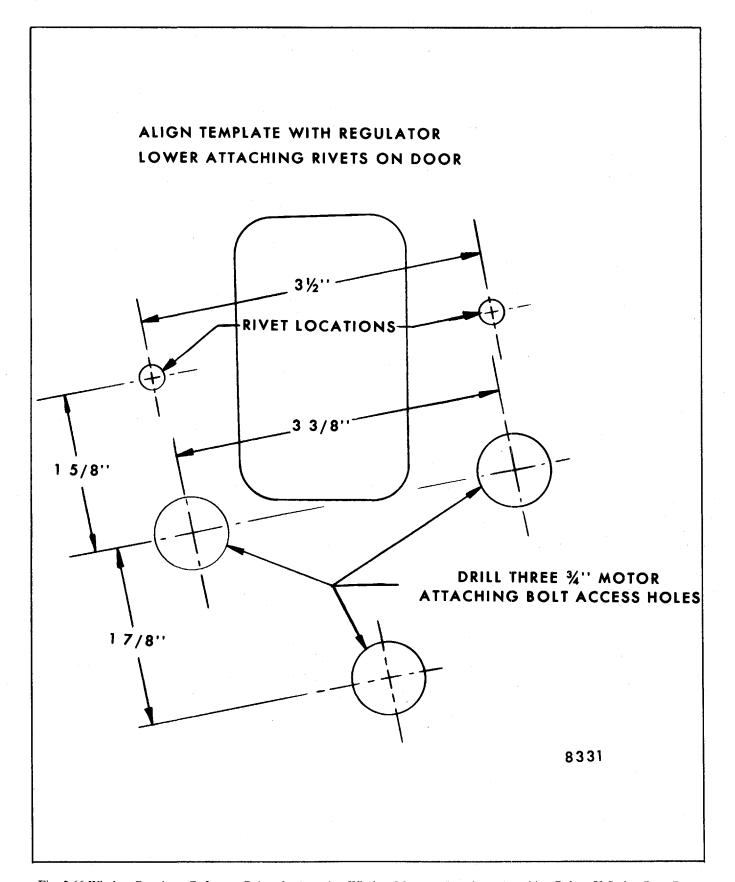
Window Regulator Reference Points for Locating Window Motor to Regulator Attaching Bolts - X Styles, Rear Door
